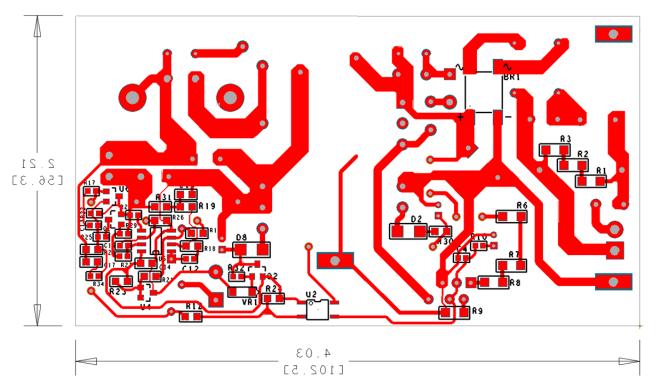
Printed Circuit Layout, Bottom Side Traces and Components.
